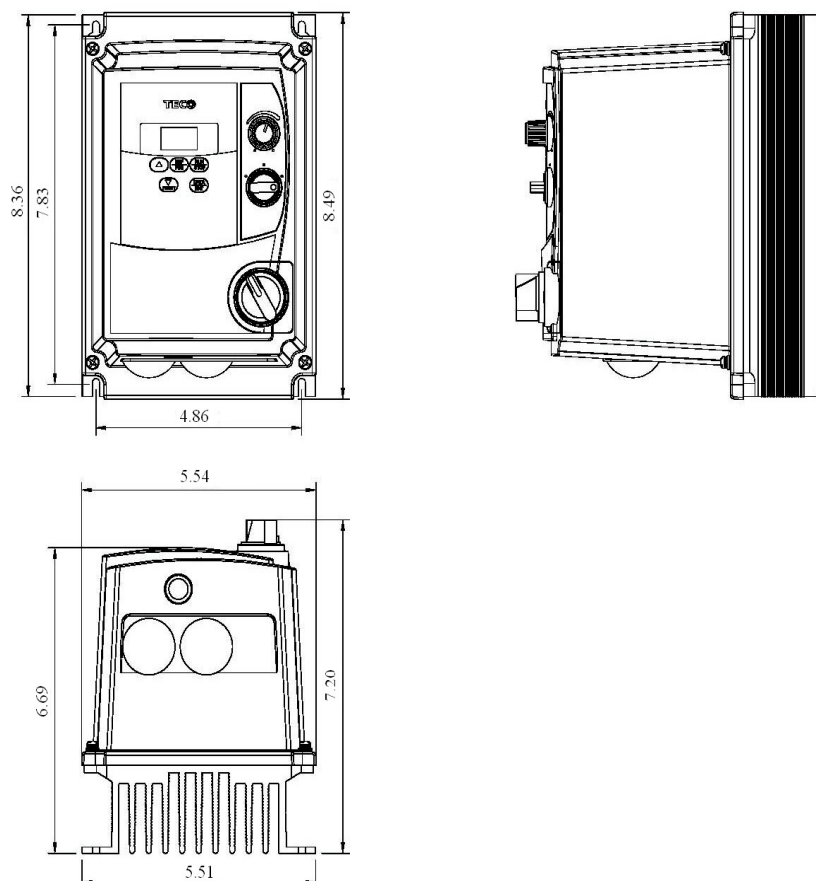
EV Drive IP65 (switch) Frame 1 dimensions
